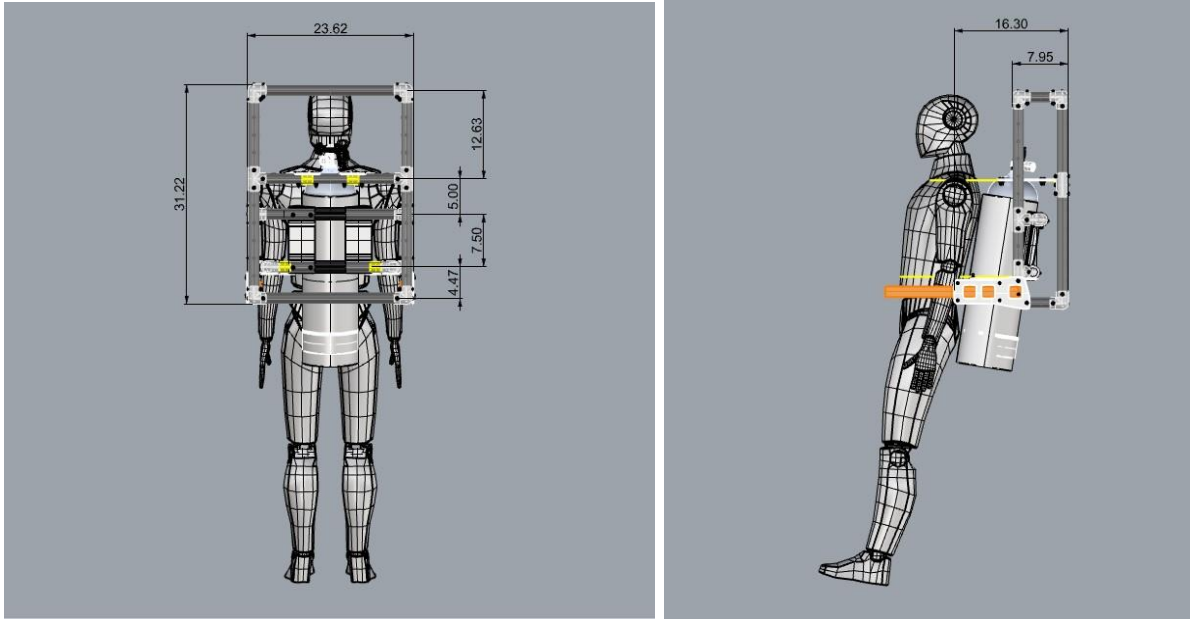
Design drawings for SEATEST 6 PLSS mockup (Dimensions shown are in inches).
